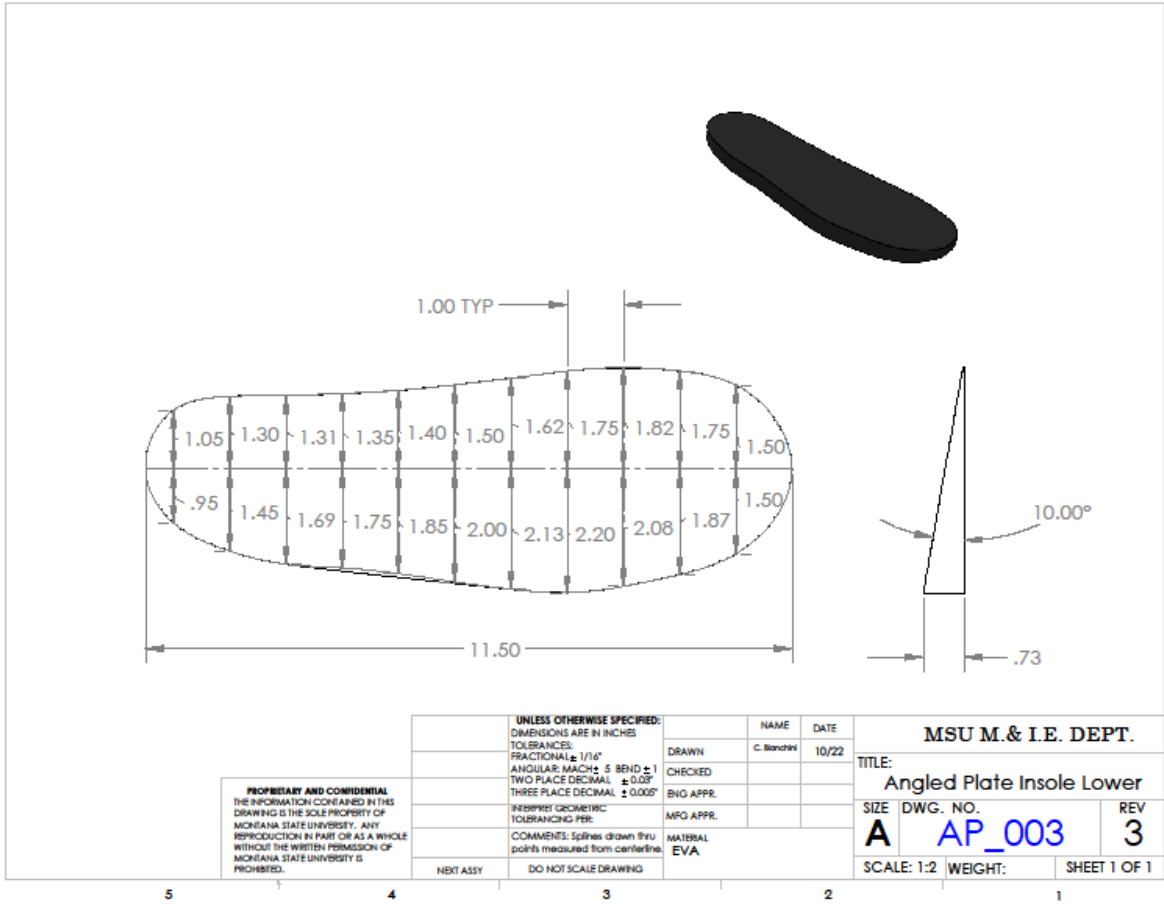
Part drawing of the lower foam portion of the angled plate insole.
